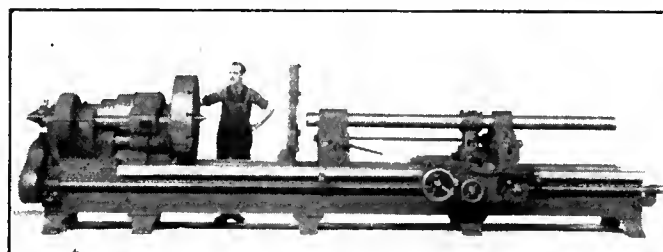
SHOWING A 36-IN. TRIPLE-GEARED ENGINE LATHE EQUIPPED FOR STRAIGHT OR TAPER BORING OF SHELLS.
